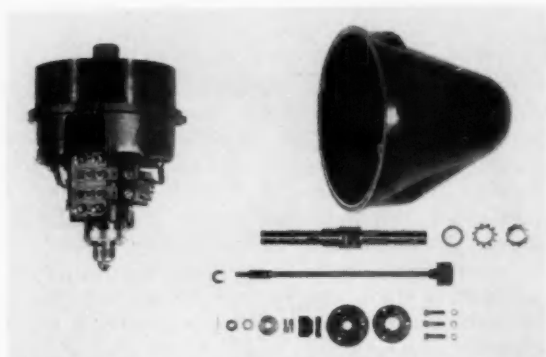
Quill shaft distributor for R-2800 engine. Assembly is at left and kit required to convert standard distributor is shown at right
